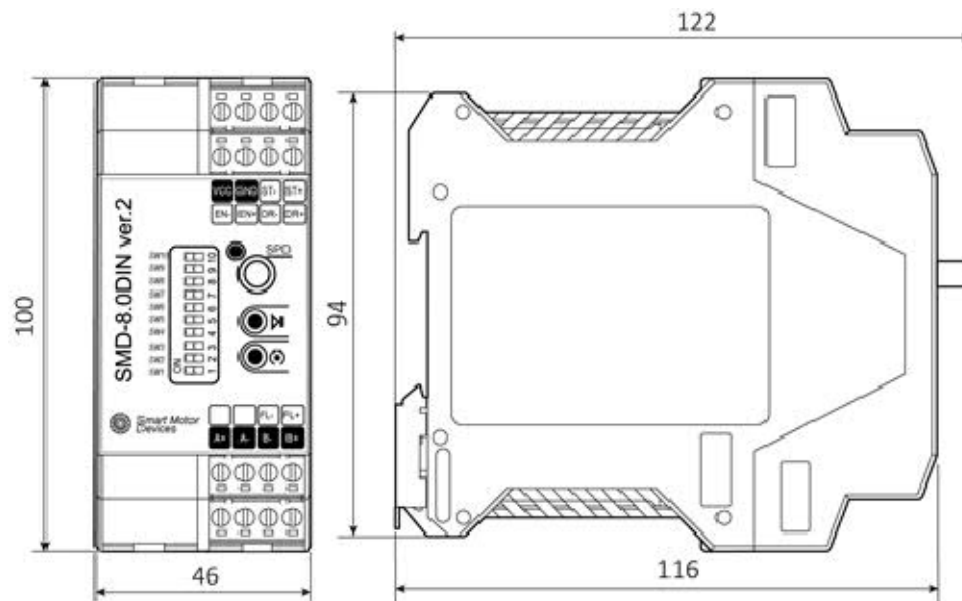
Dimensions of the stepper motor driver SMD-8.0DIN ver.2
